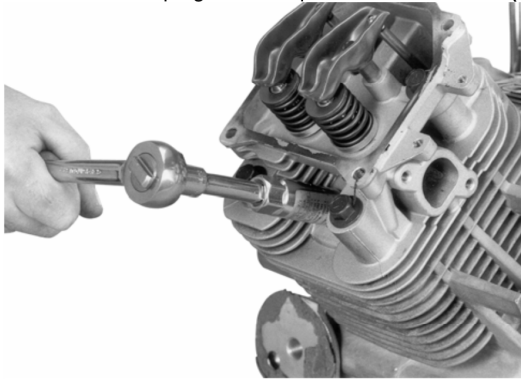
Install New Spark Plugs and Tighten to Torque Specified.
